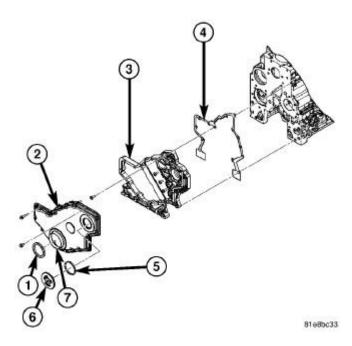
Front Cover Assembly Components Courtesy of CHRYSLER GROUP, LLC
